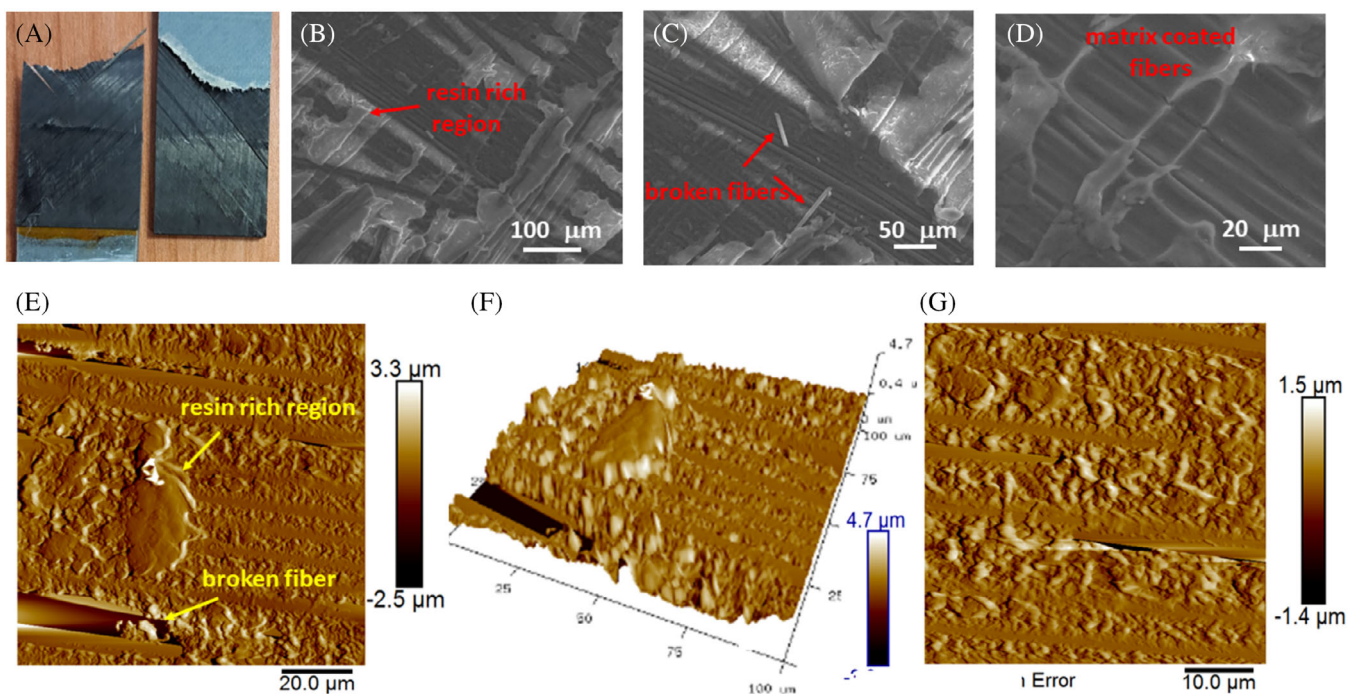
(A) fracture surfaces of welded joints; (B–D) SEM micrographs of the fracture surfaces; (E,F) AFM images of the fracture surfaces.
